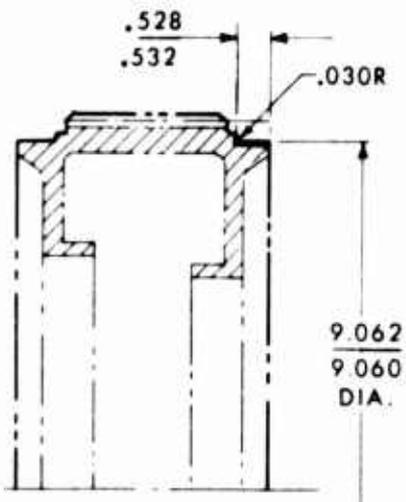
RG351-11181-103 Machine Operation Drawings (Sheet 2 of 3).
